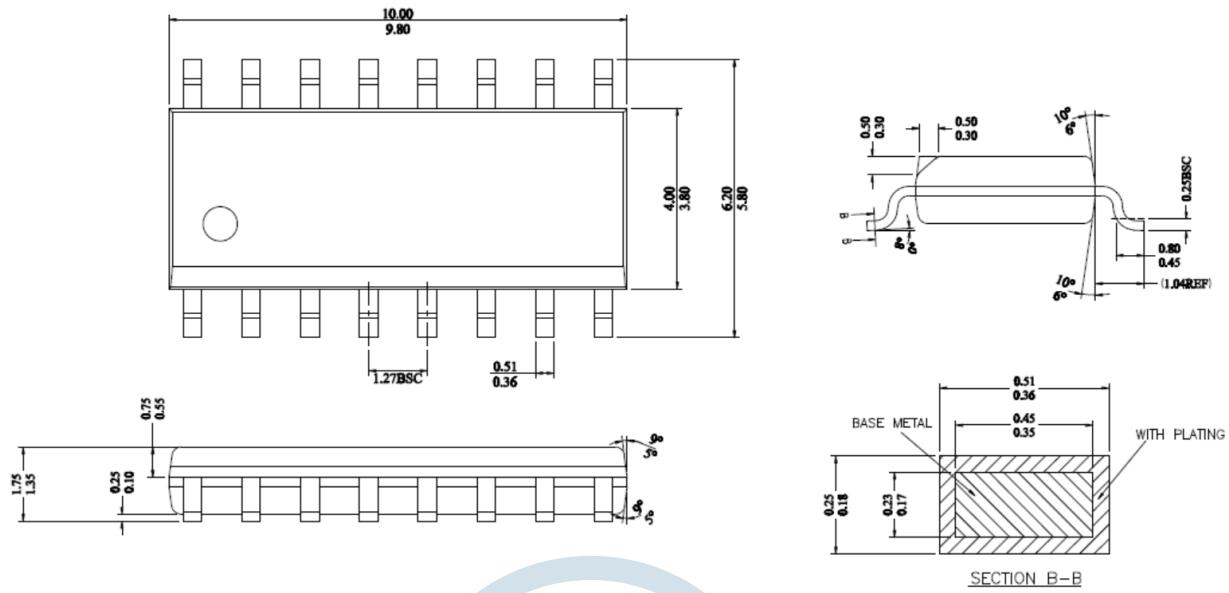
16-Lead Narrow Body SOIC [NB SOIC-16] Outline Package–dimension unit(mm)
